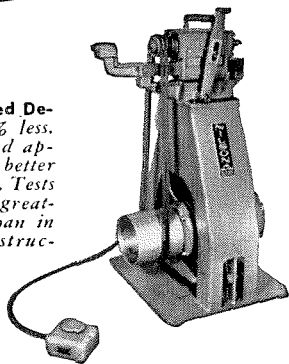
Original Design of wire straightening machine. Required considerable machining, cleaning and finishing prior to painting.
